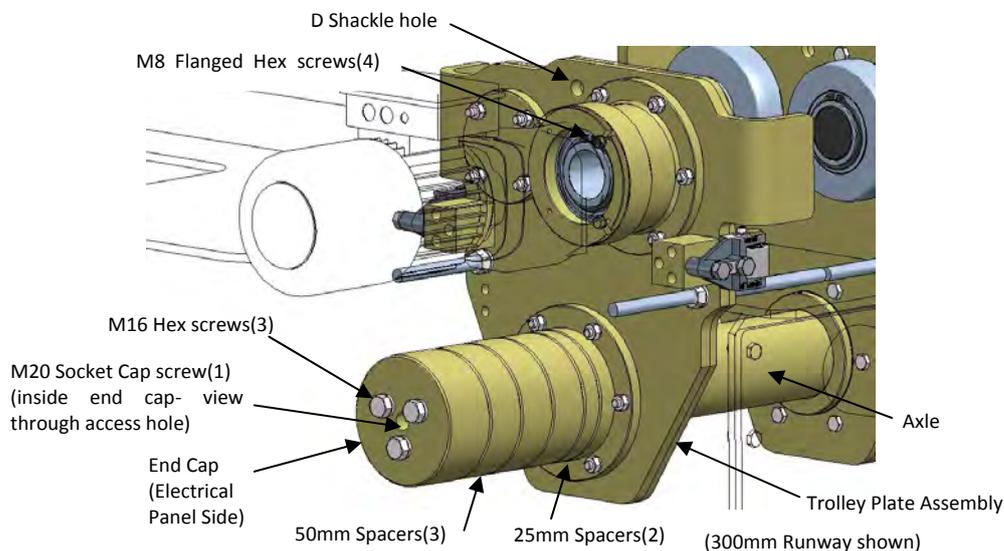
CT Trolley Plate Assembly 'Electrical Panel side'
